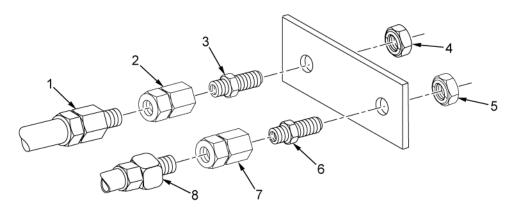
Location J, Adapters from Platform Weldment, Typical 10 Places.
